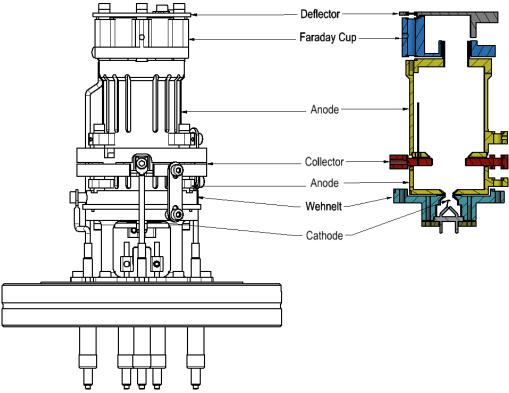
Lateral view and cross section representation of the IRG080 gauge head
